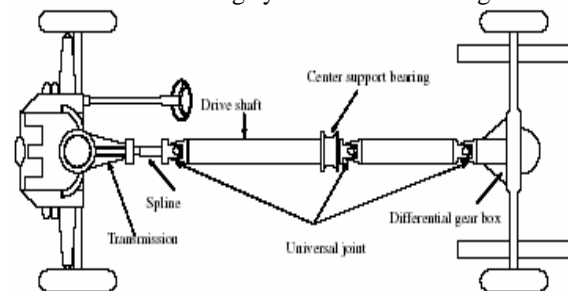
Two piece drive shaft arrangement for rear wheel vehicle driving system
